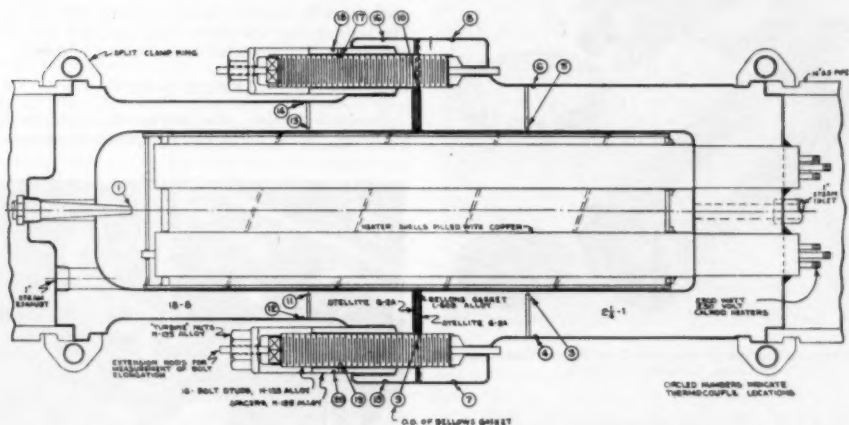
SECTIONAL VIEW OF BELLOWS-TYPE JOINT AS ASSEMBLED FOR TEST
